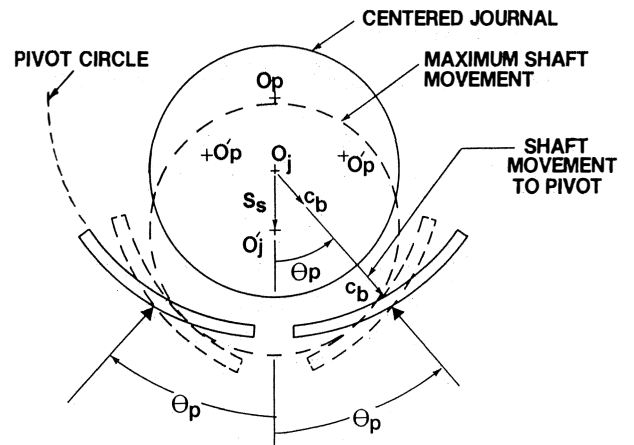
Tilting Pad Bearing Static Shaft Sink.
